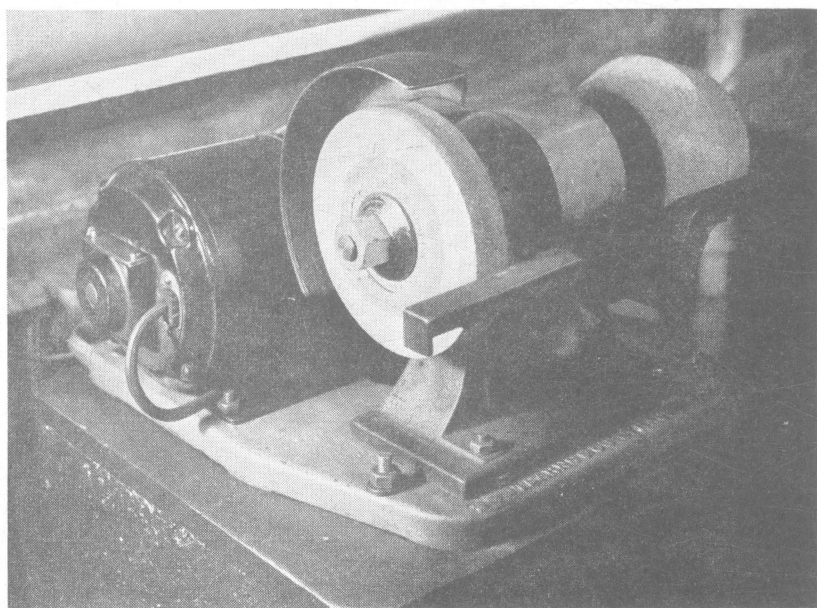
This farm grinder, with motor, grinding wheels, and wire and cloth buffers, can be purchased for about \$25. It is a real labor saver, and a piece of shop equipment that will be used throughout the year.
